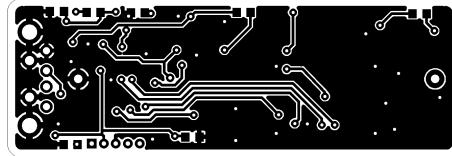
First μPINPoint prototype PCB artwork bottom layer (actual size).
